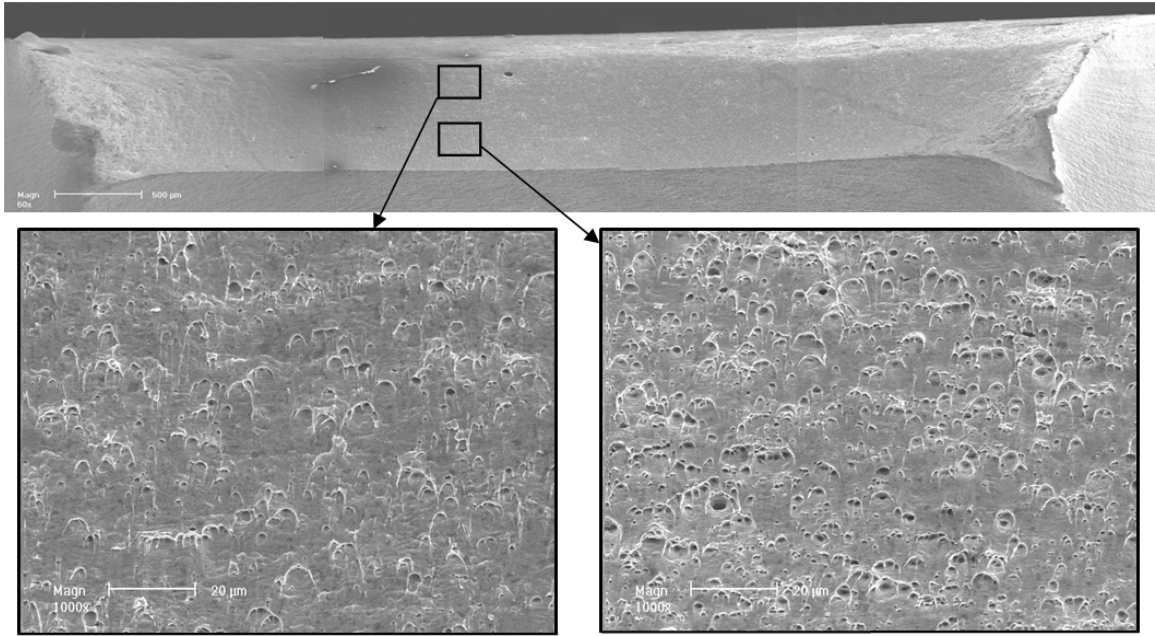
A scanning electron micrograph and close-up views of the failure surface from a specimen machined from a wide specimen with a weld length of 15 mm.
